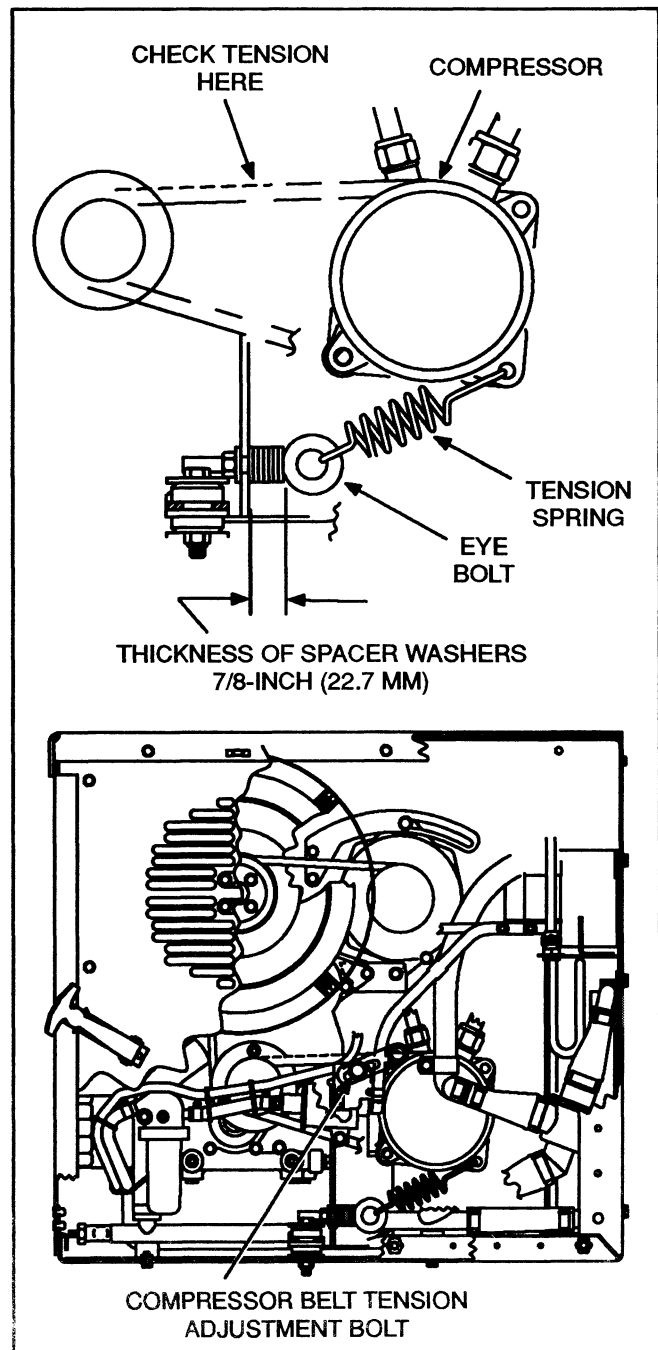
COMPRESSOR BELT ADJUSTMENT
